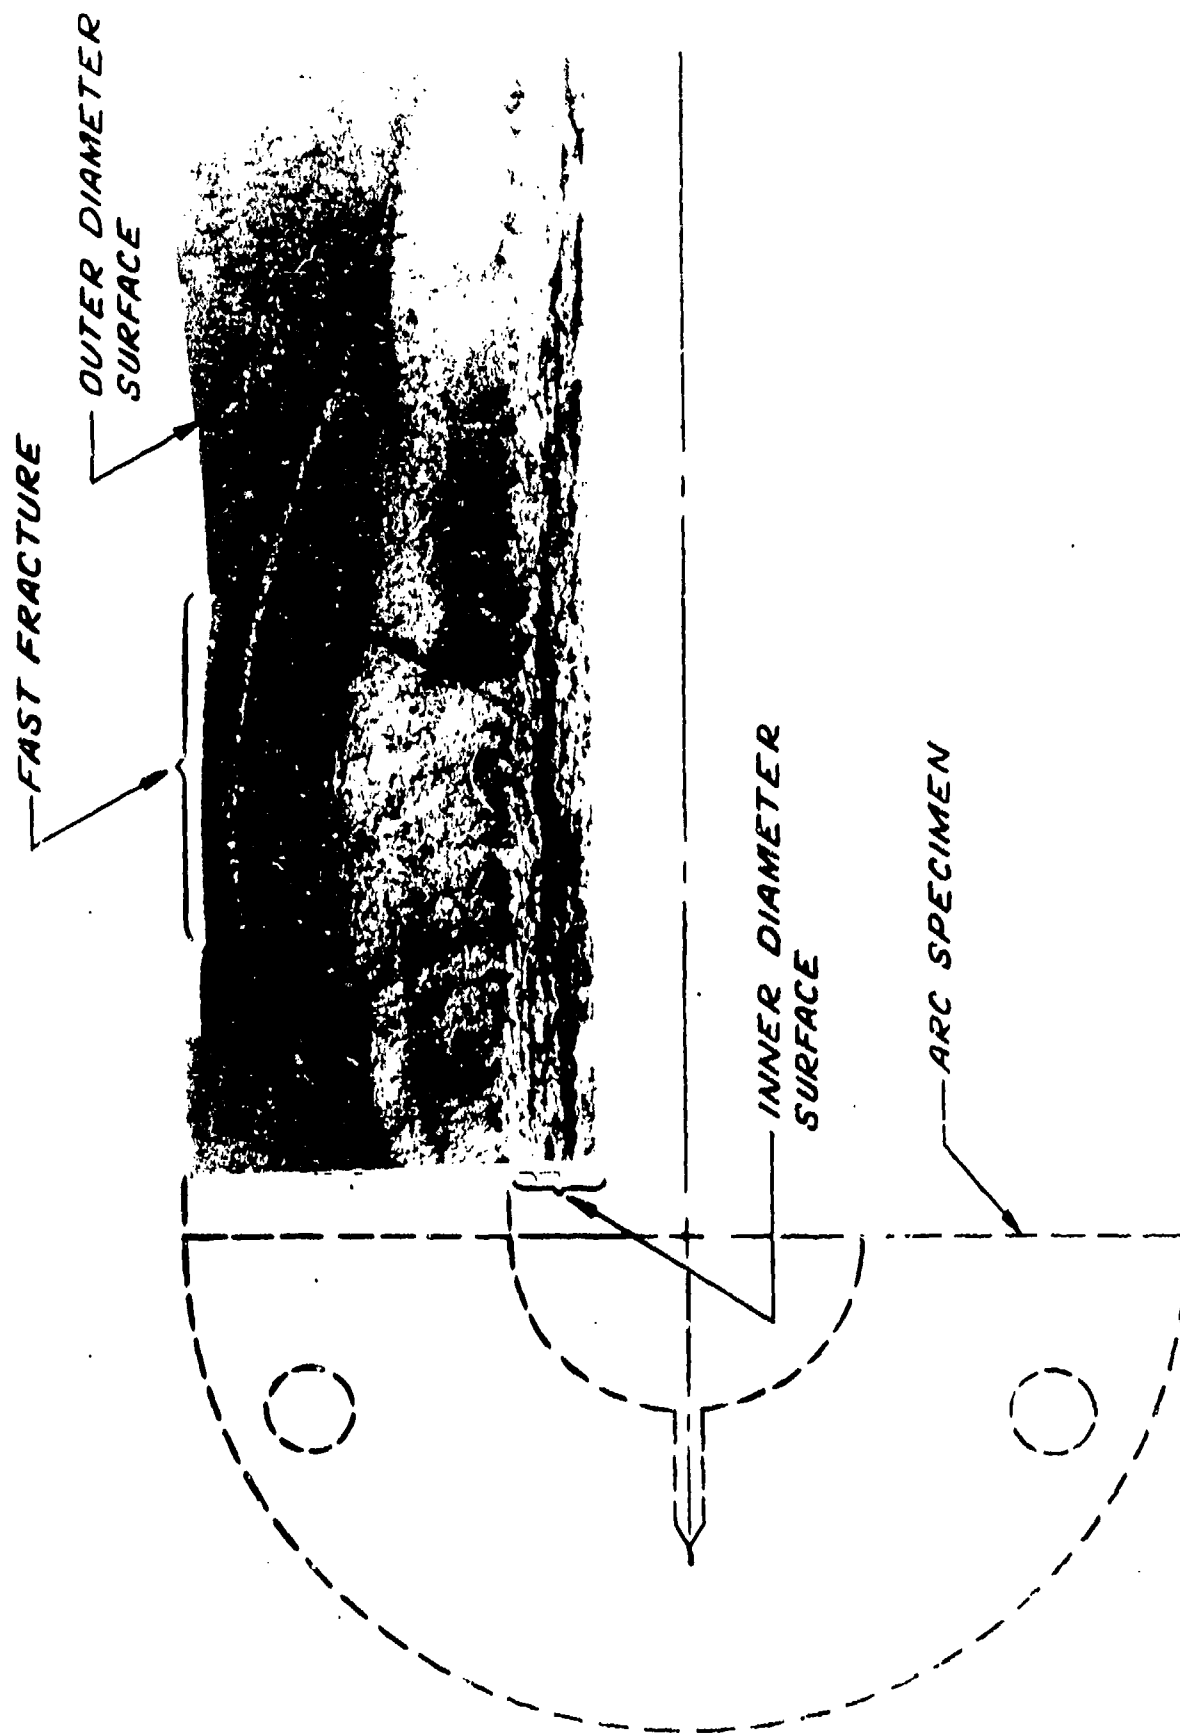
Fracture Surface of Cannon Tube Following Actual and Simulated Firing, Along With Sketch of Arc Specimen Used For Fracture Toughness Testing.
